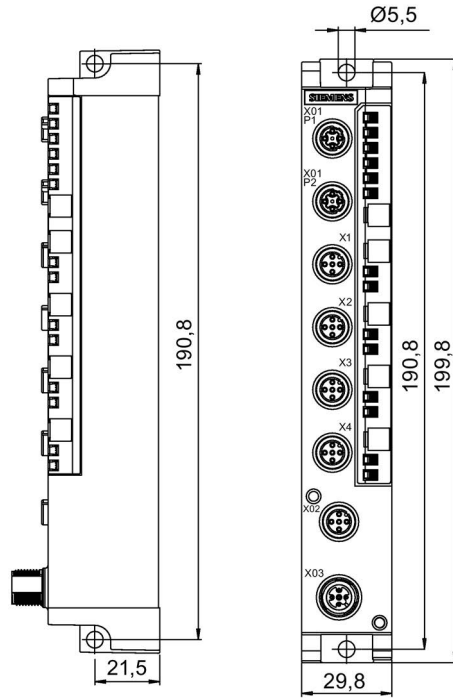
Mounting the I/O device on a panel (30 mm)
